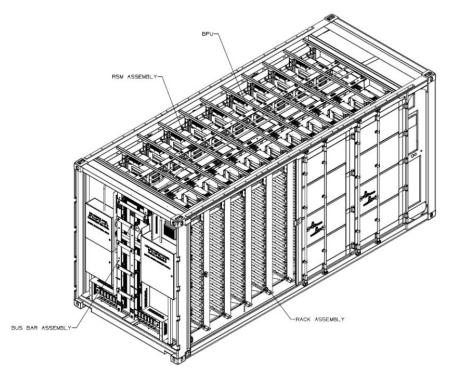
BESS container – isometric view (actual container shown; test enclosure will be half the length)
